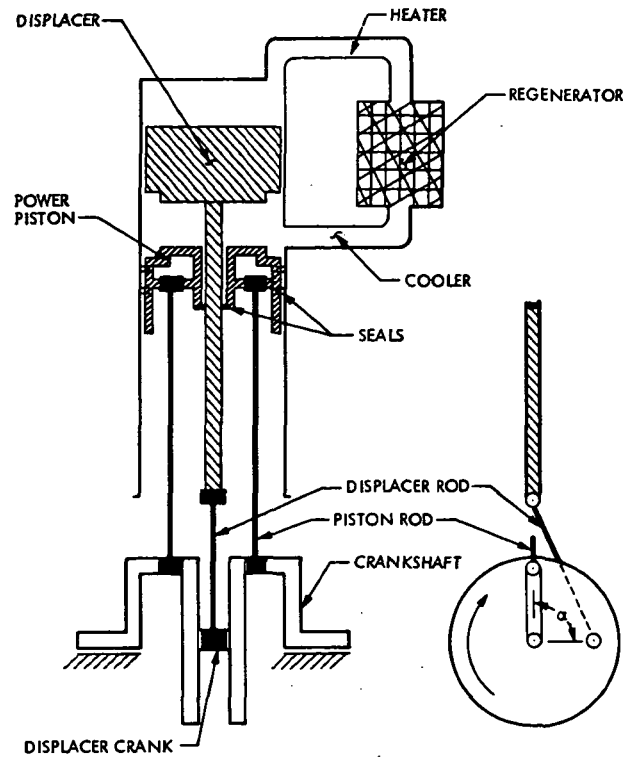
Crankshaft drive for a piston displacer Stirling engine
